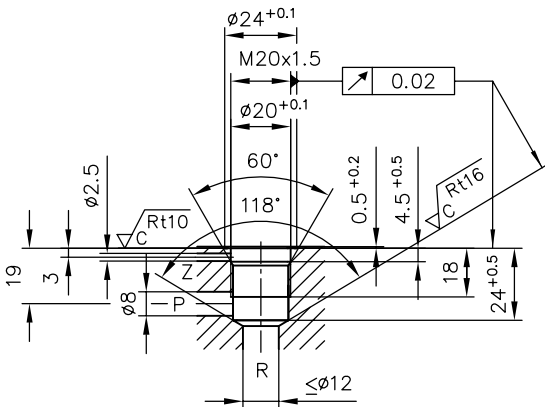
Mounting hole Type CNE 21, CNE 22, CNE 23
